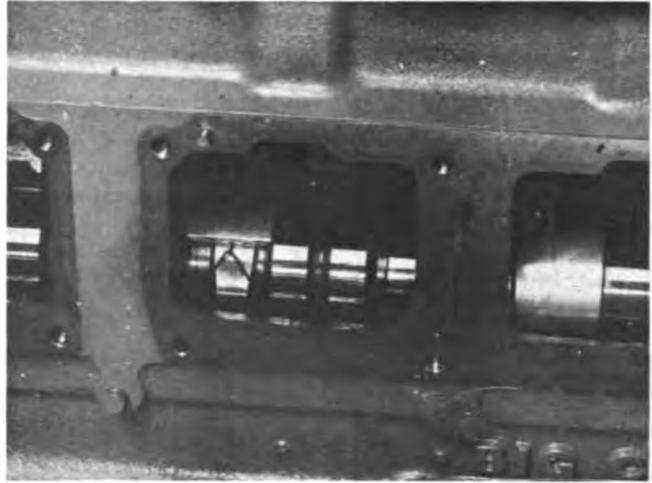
(N100152). Use The 3375268 Pilot To Prevent Damage To The Camshaft.
